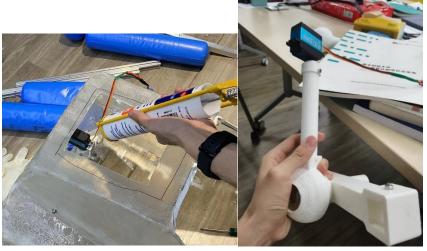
Some making details for 2<sup>nd</sup> prototype
